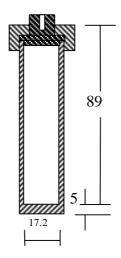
Molybdenum cylindrical cup, with dimensions in mm.
